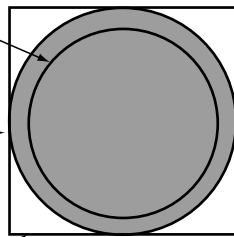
Footprint - 5 mils stencil - non solder mask defined
